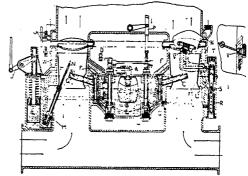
Diagrammatic section of carburetter. See also Fig. 6, page 276, Vol. II.
